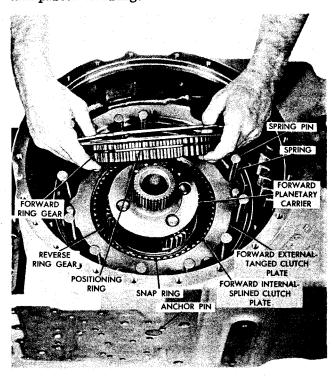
Installing forward-range clutch plates, ring gear, springs and pins
